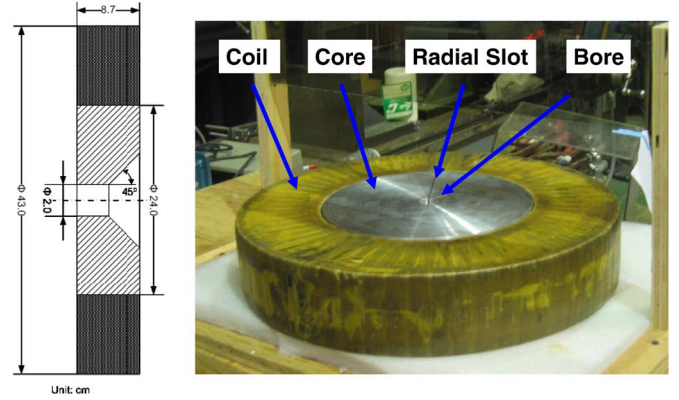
Cross section and picture of a prototype flux concentrator, which includes a coil surrounding an aluminum core.
